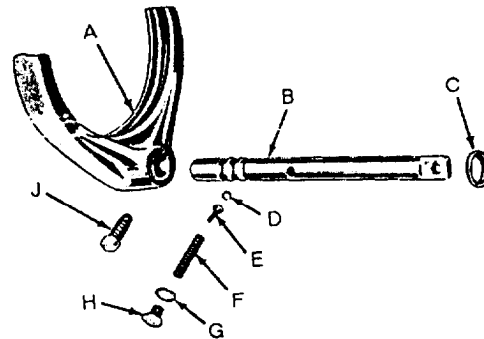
Transfer case high low gearshift shaft, locking setscrew and locking wire.
